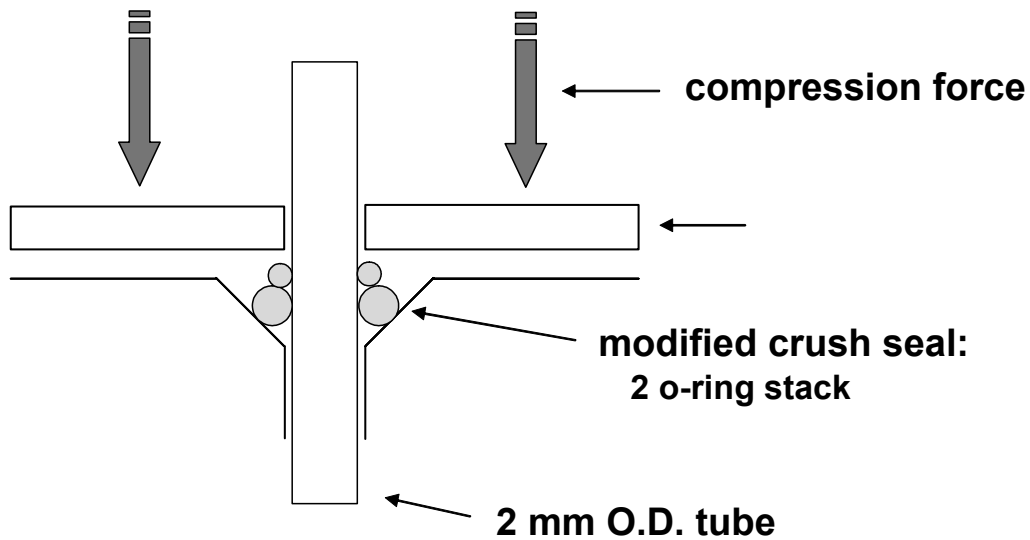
Illustration of the modified crush seal technique used to create a bi-directional o-ring seal
